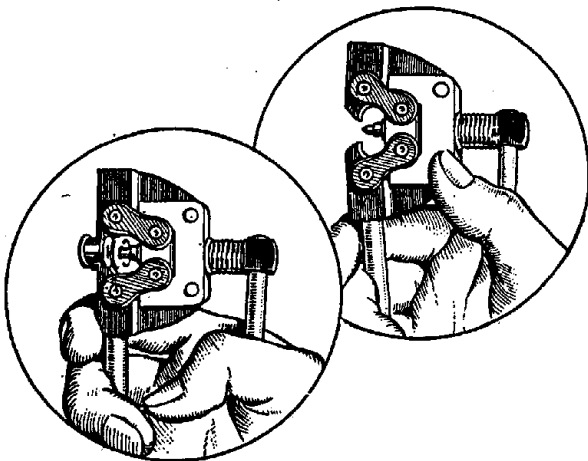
METHOD OF USING THE RIVET EXTRACTOR.
